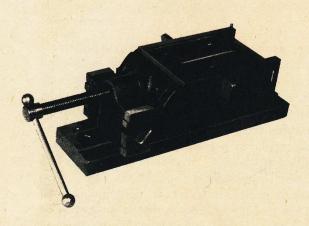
Operations 3 and 4 on the rear-side slide forging are performed in a milling fixture built around a standard Yankee machine vise. The form cutters for the right and left ends of the slide are mounted side by side on the milling machine arbor and sixteen pieces are placed in each side of the fixture, location is against surfaces A and B machined in operation 2
